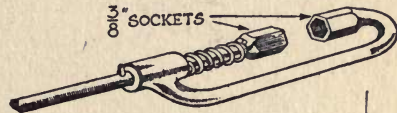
Jew socket wrench for removing the crankcase bolts. This method is even faster than the knee wrench and speeder as the spring holds the lower socket up against the bolt head
